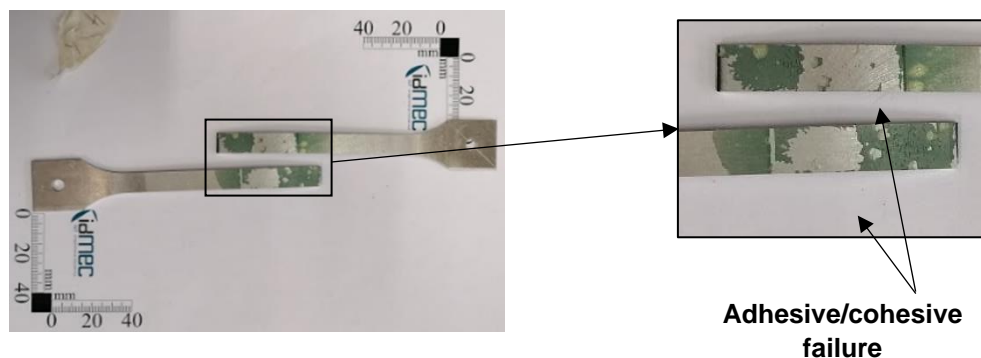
AB-1 specimen failure zone, at 100 mm/min.
